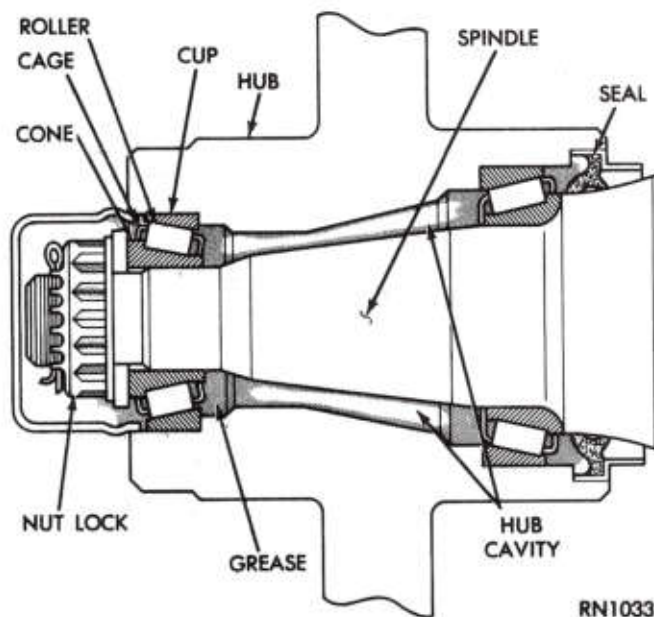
Front Wheel Bearings 2-Wheel Drive Models
